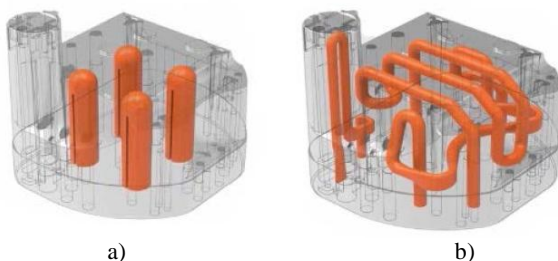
Conventional cooling channel core with buffers (a) vs. conformal cooling channel design (b) (Source: 3dsystems.com)
